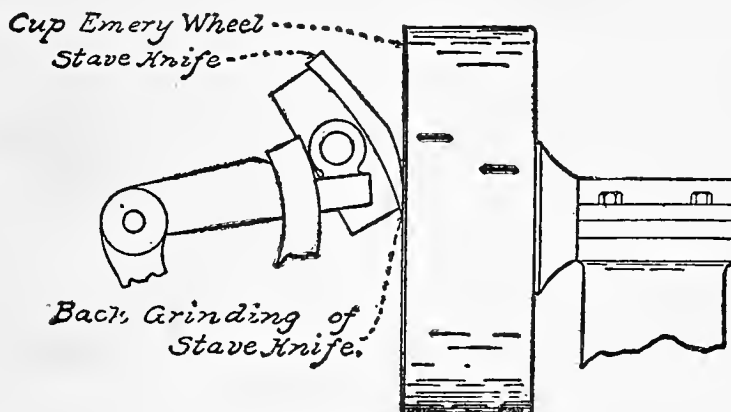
DETAIL SKETCH OF BACK GRINDING OF STAVE CUTTER KNIFE.
